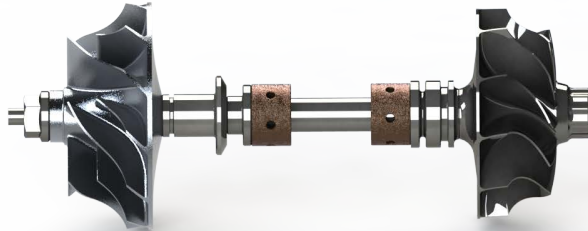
Turbocharger rotor with a compressor wheel (left hand side) and a turbine wheel (right hand side). The two bronze colored sections are the floating ring bearings. The thrust bearing is located in between the collars adjacent to the left hand floating ring bearing. This specific turbocharger rotor is for a small size gasoline engine and has a length of just over 100mm.
